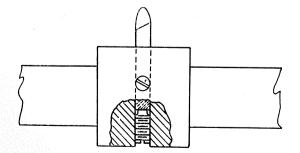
Boring a small grinder spindle bearing housing held in the clamping plate. This plate is described on page 168.
